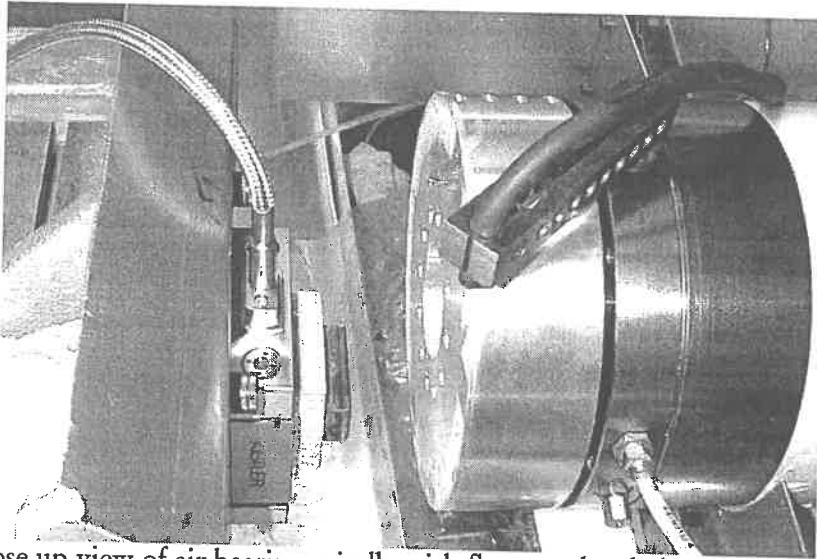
Close up view of air bearing spindle with flycutter head, dynamometer, and silicon workpiece. A hose for coolant is shown above the workpiece/tool contact point.
